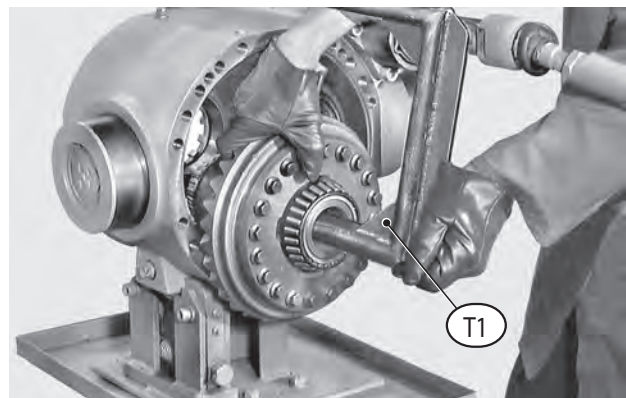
Remove the differential unit by using tool T1 (See drawing T1 p. 89); position the unit on a workbench.
